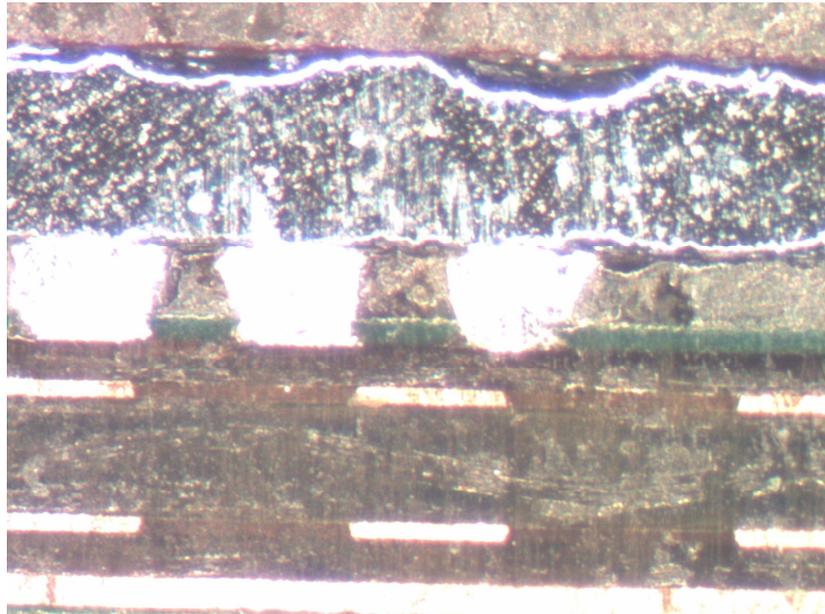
Hot Melt 2 on FR4 Test Board CSP Image
